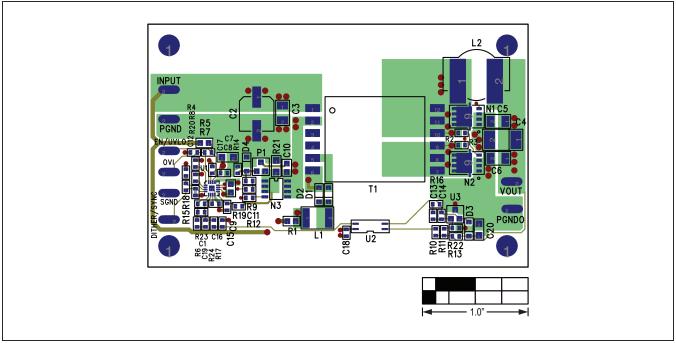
MAX17598 EV Kit PCB Layout—Component Side
